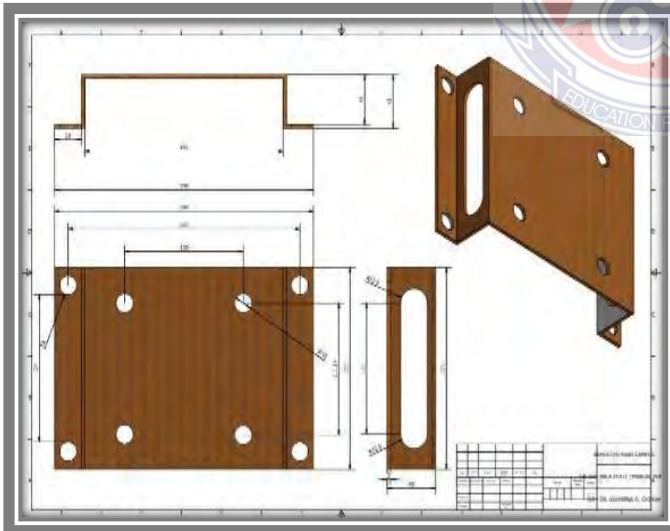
, SN 36A: Movable Wheel Port/Pump Back Plat
